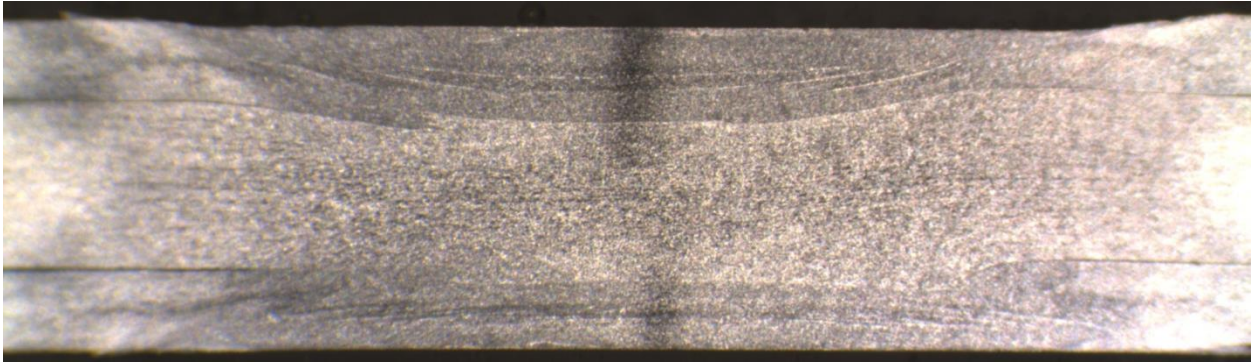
Macrosection of an Al-Al-Al triple lap spot weld made using RAFSSW.
